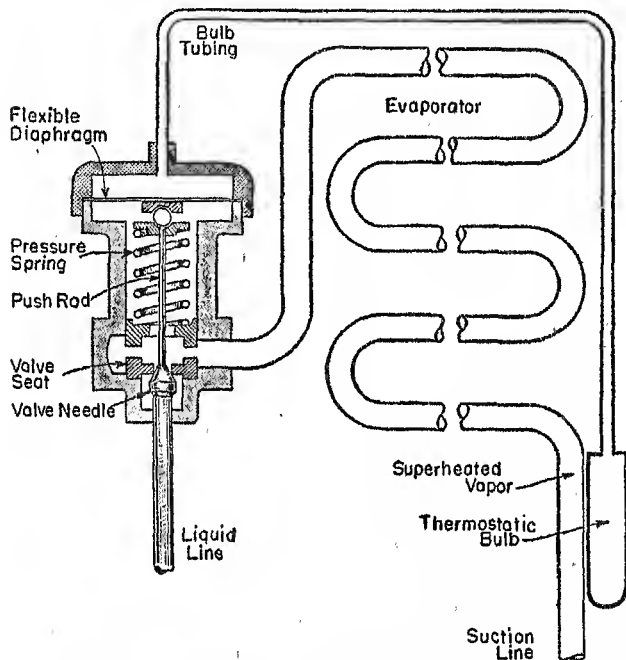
The Principal Parts of a Thermostatic Expansion Valve.
